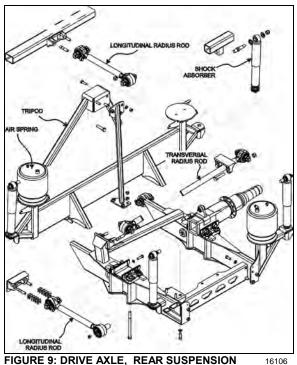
DRIVE AXLE, REAR SUSPENSION
